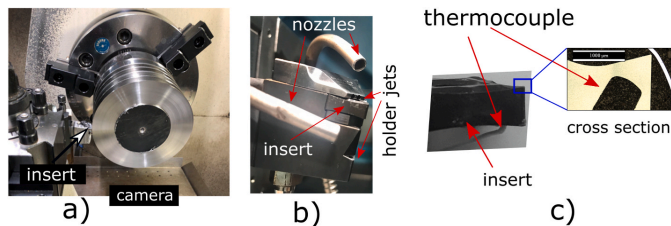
a) Orthogonal cutting during thermal camera measurements, the bar consists of discs of width equal to the depth of cut. b) The tool holder equipped with nozzles used during machining in argon. c) Insert with an embedded thermocouple and the cross section showing the thermocouple placement.
